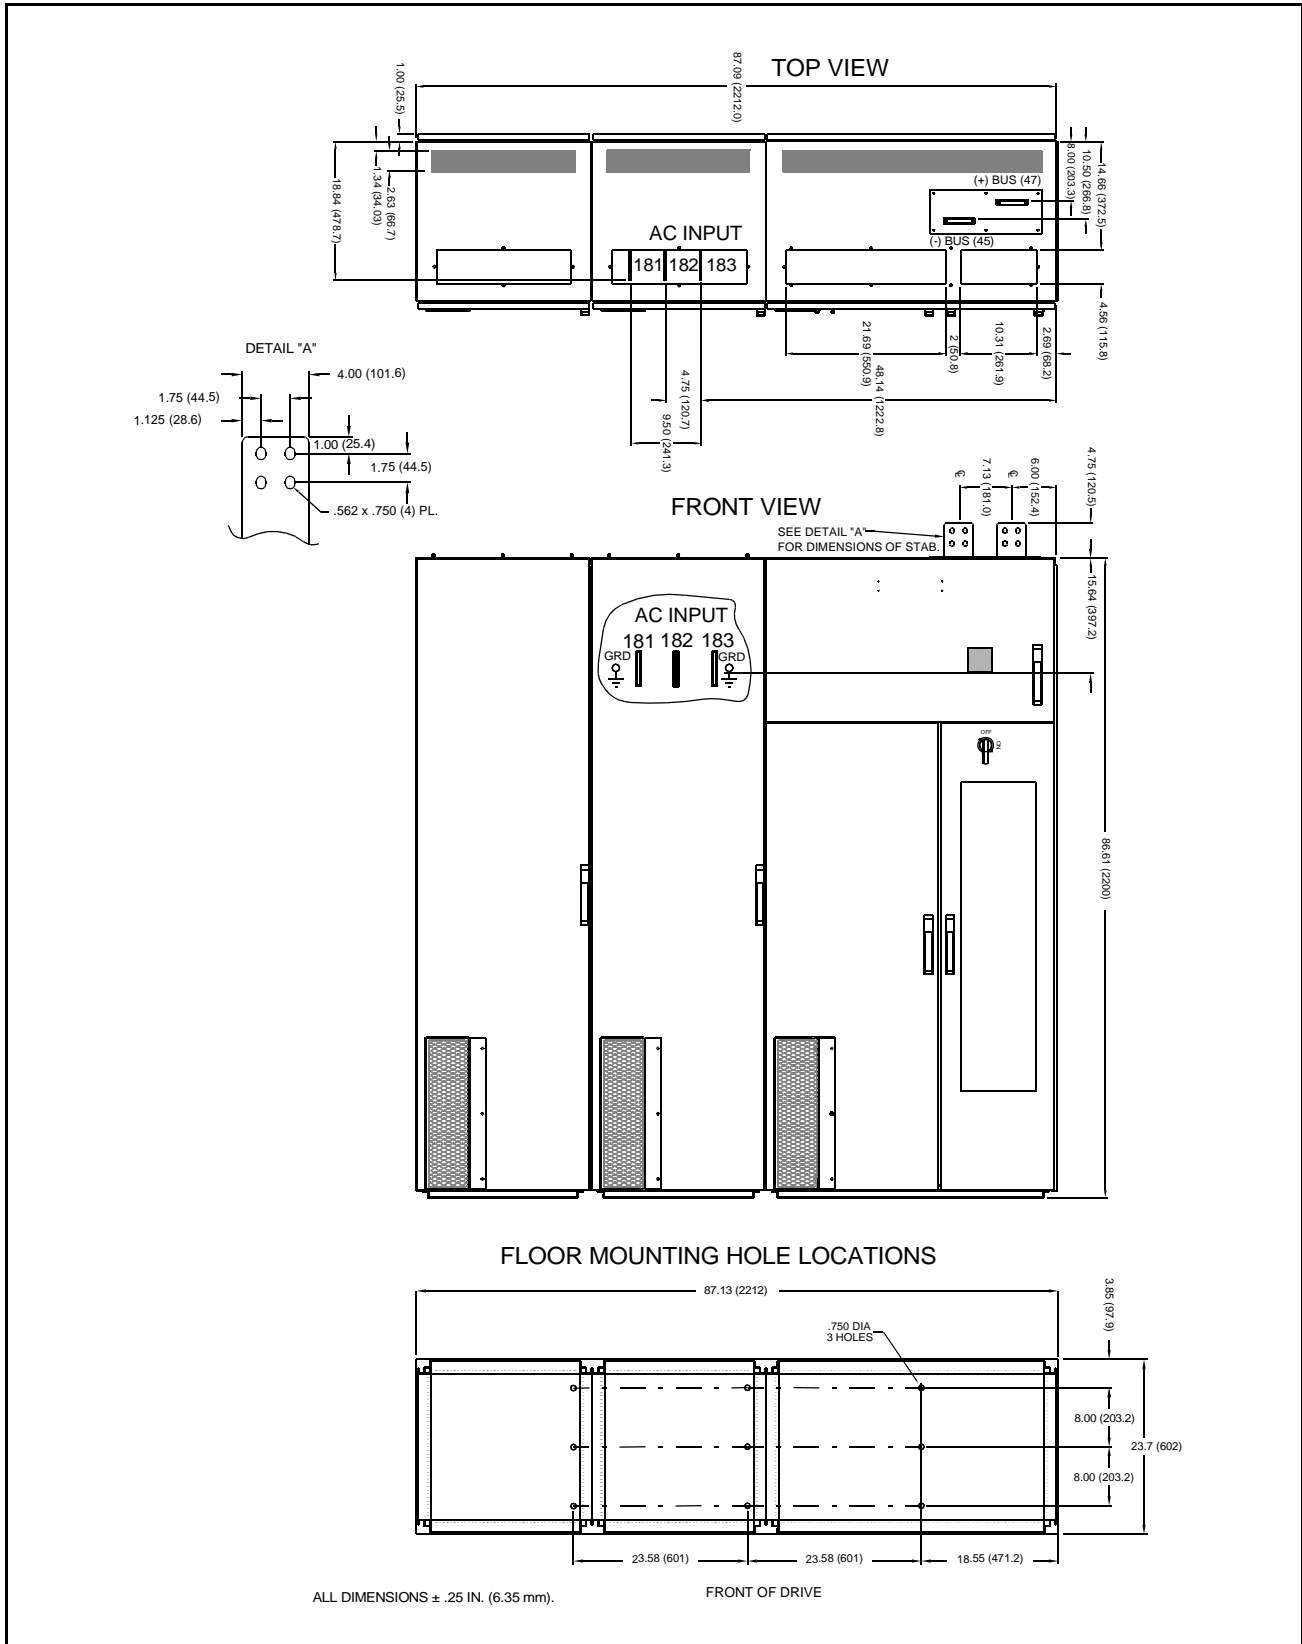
1335A SB3000 Power Module Mounting Dimensions
